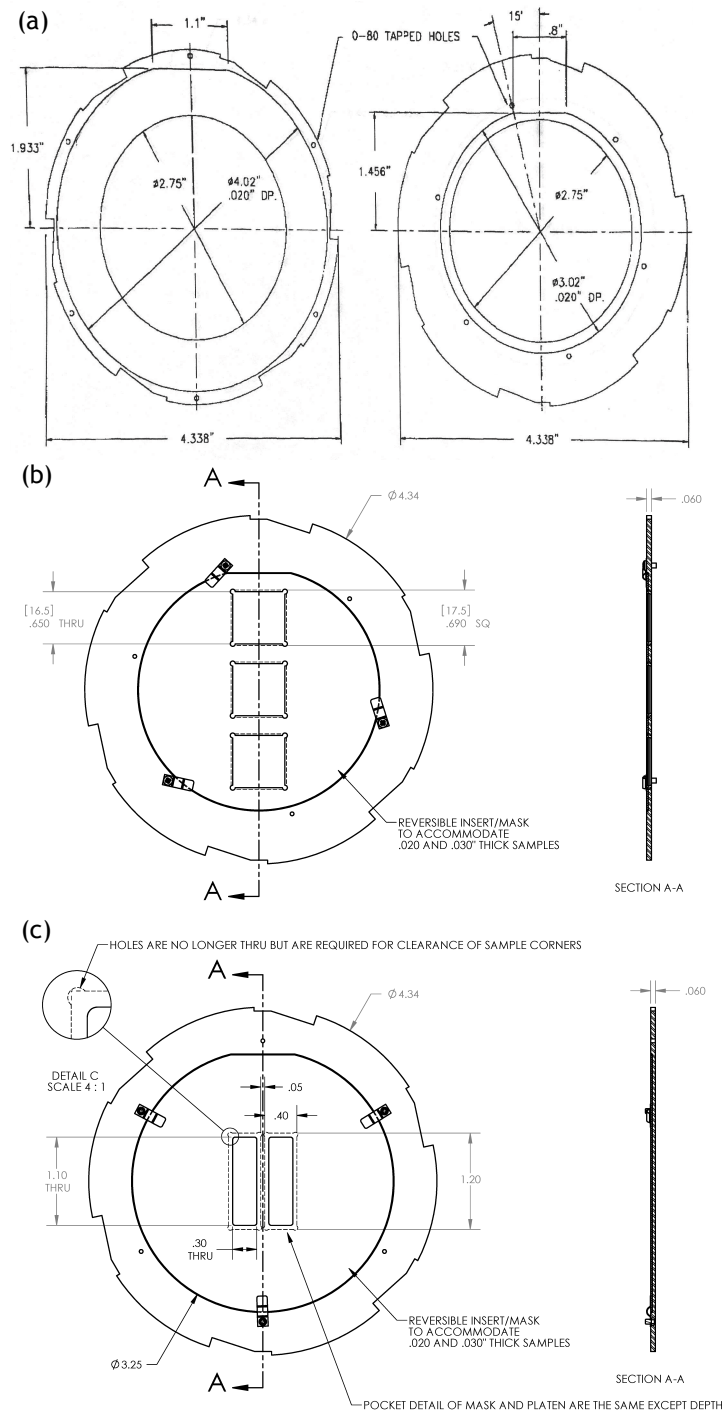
Drawing of three Mo sample platens: (a) design A for holding a 100-mm wafer. (b) design B for holding up to three $17 \times 17 \text{ mm}^2$ coupon samples. (c) design C for holding up to two $10 \times 25 \text{ mm}^2$ rectangular samples (courtesy Thermionics Northwest, Inc.).
